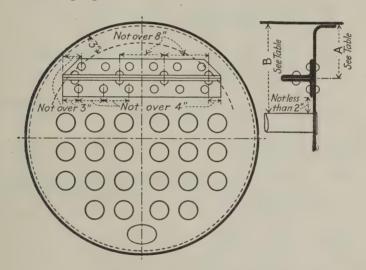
Staying of Head with Steel Angles in Tubular Boiler
